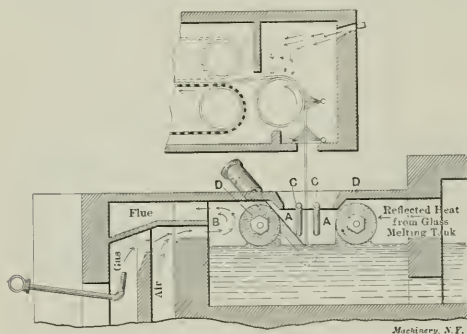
Cross-section of Perfected Continuous Sheet Machine.
